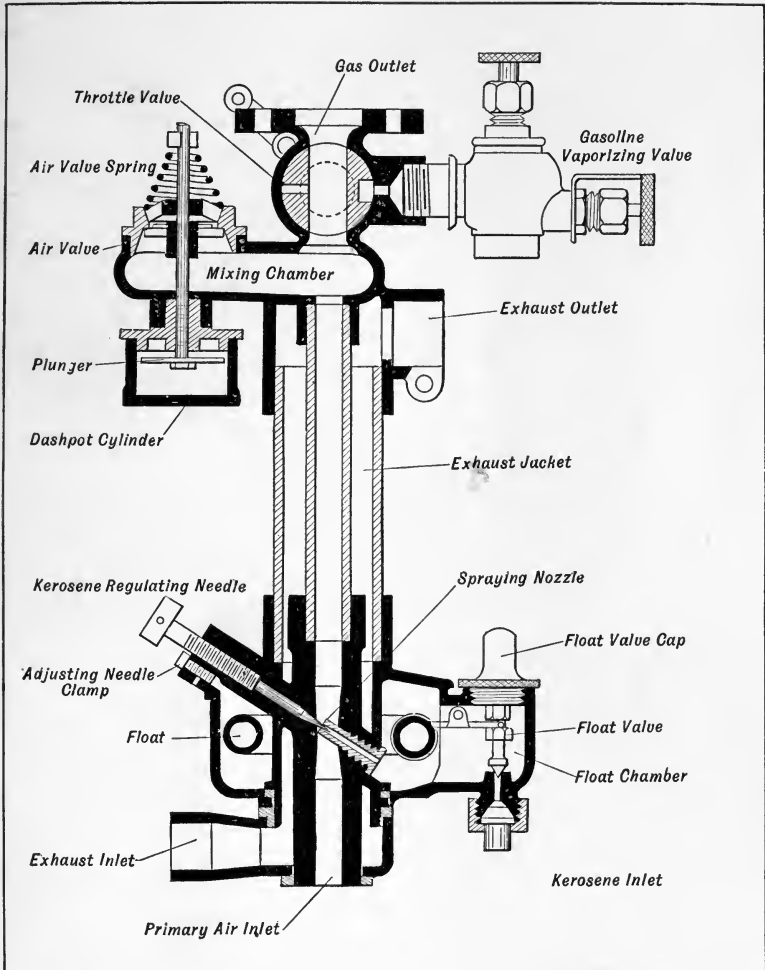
Holley Combined Gasoline and Kerosene Carburetor. May Be Used with Either Fuel, Though Specially Adapted for the Less Volatile Liquid Distillates of Petroleum, Because of Preheating Arrangement.
